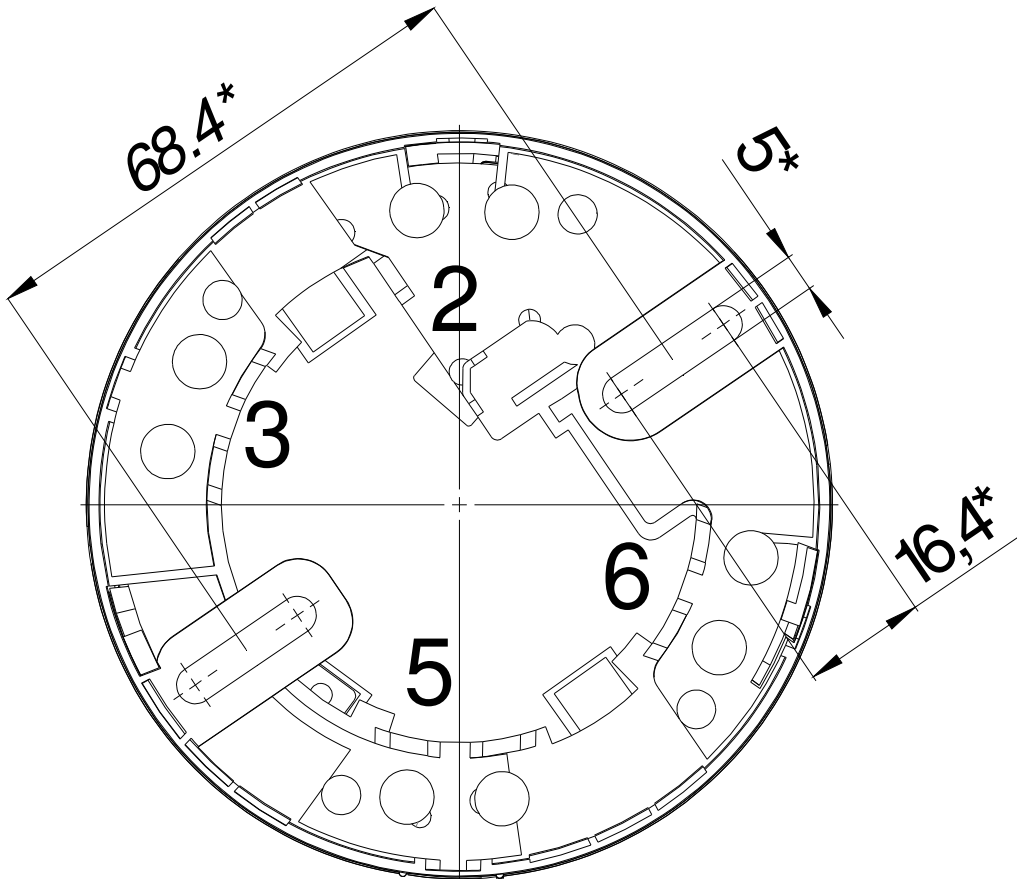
Mounting Dimensions of the Socket (Base Plate)
